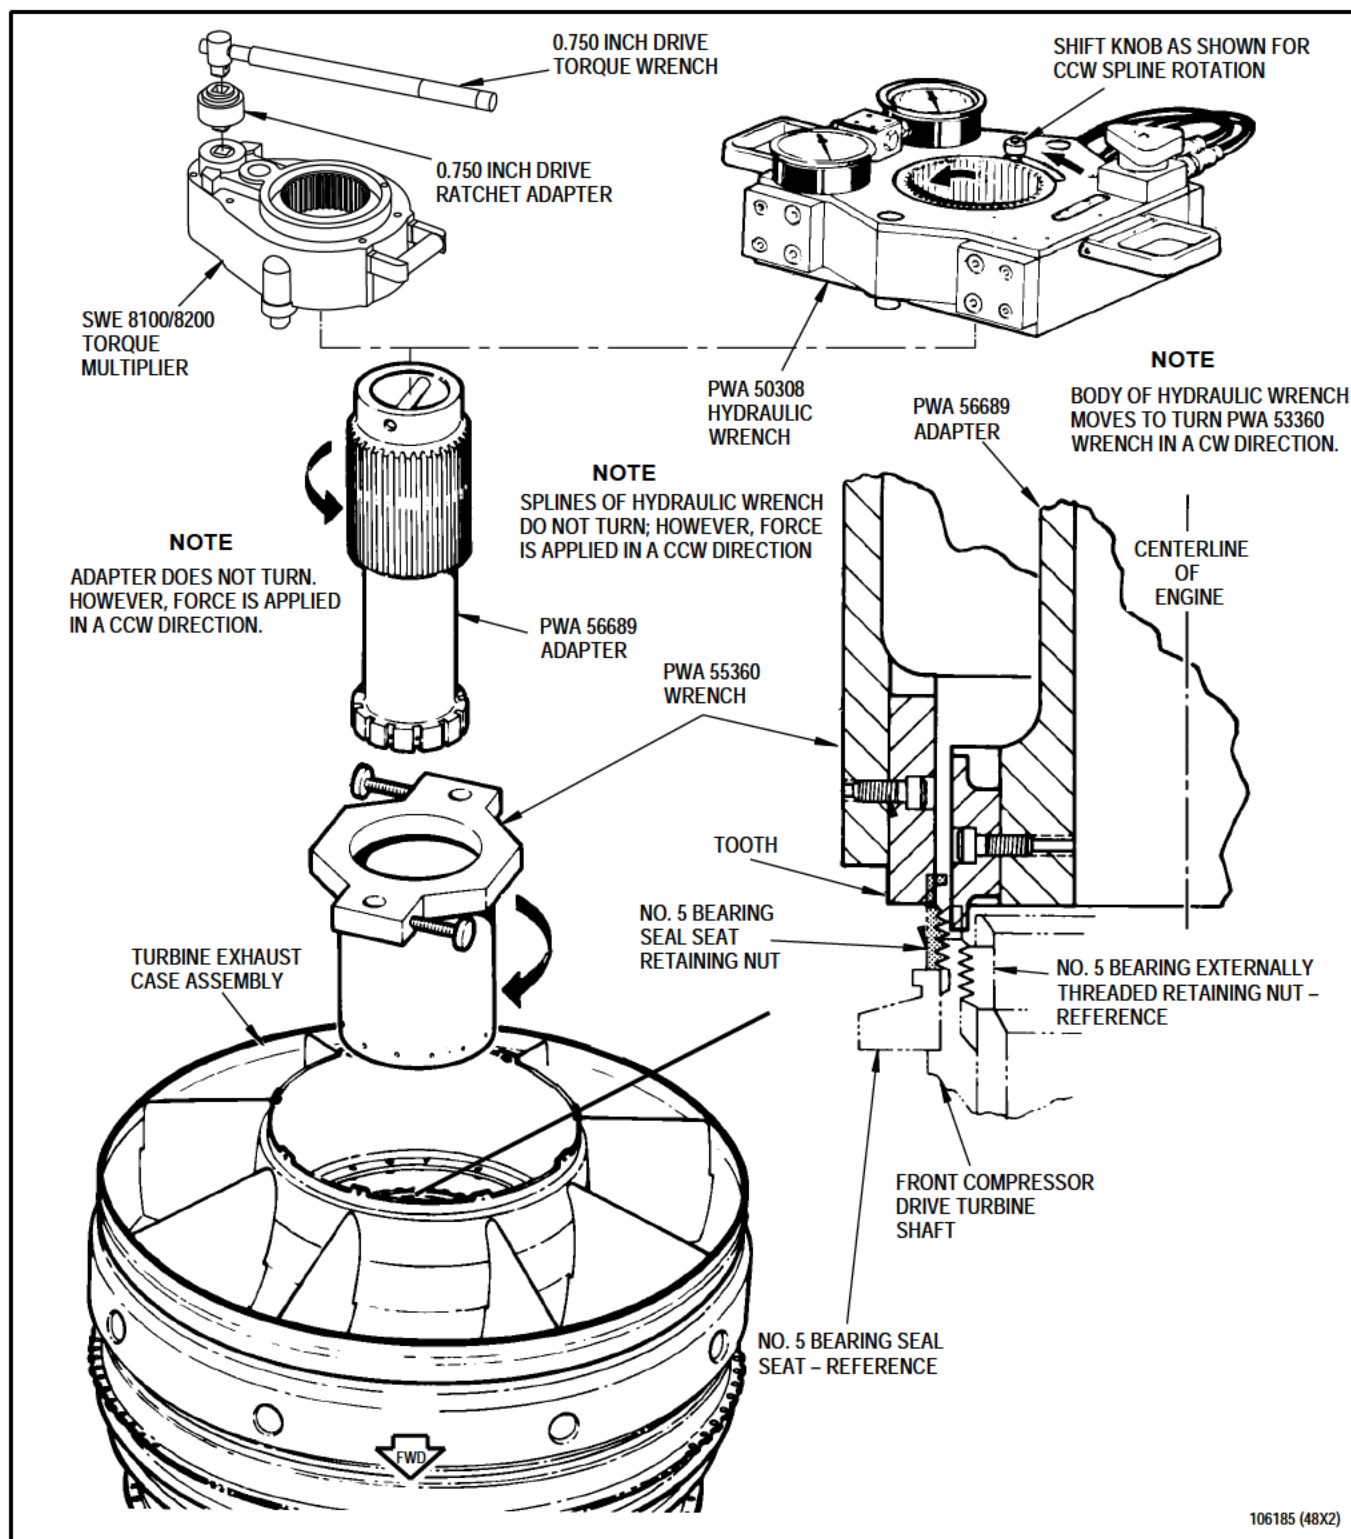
No. 5 Bearing Seal Seat and No. 5 Bearing Seal Seat Retaining Nut - Installation (Sheet 1 of 3)
